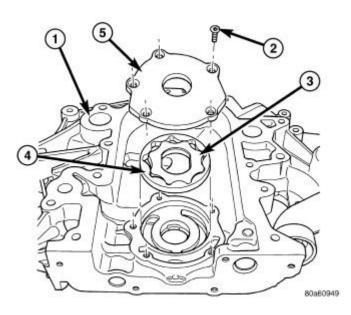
OIL PUMP Courtesy of CHRYSLER LLC
